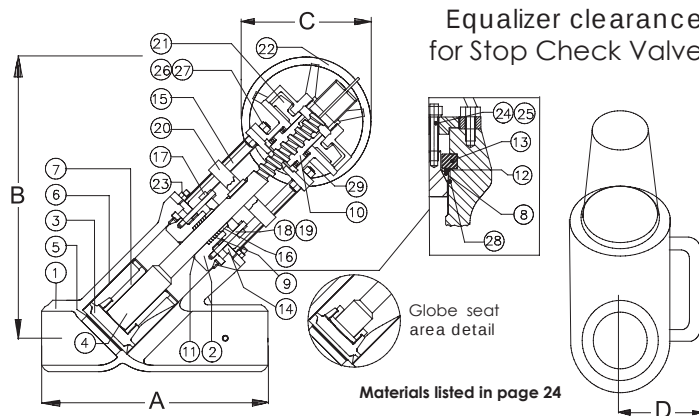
BY Globe, Butt Weld End
